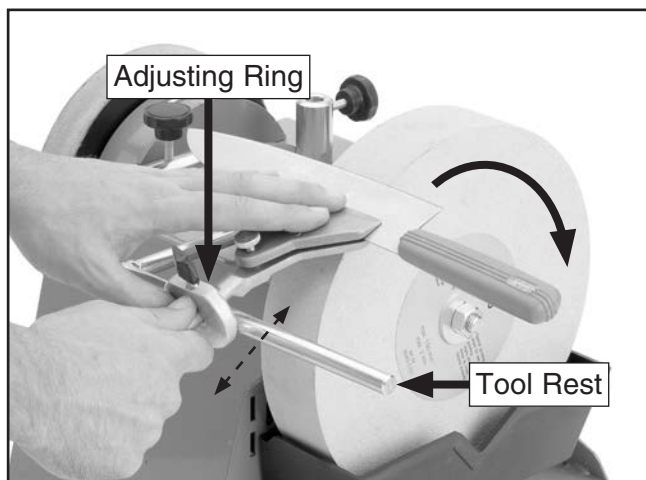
Example of grinding knife supported by jig (T32796 shown).
